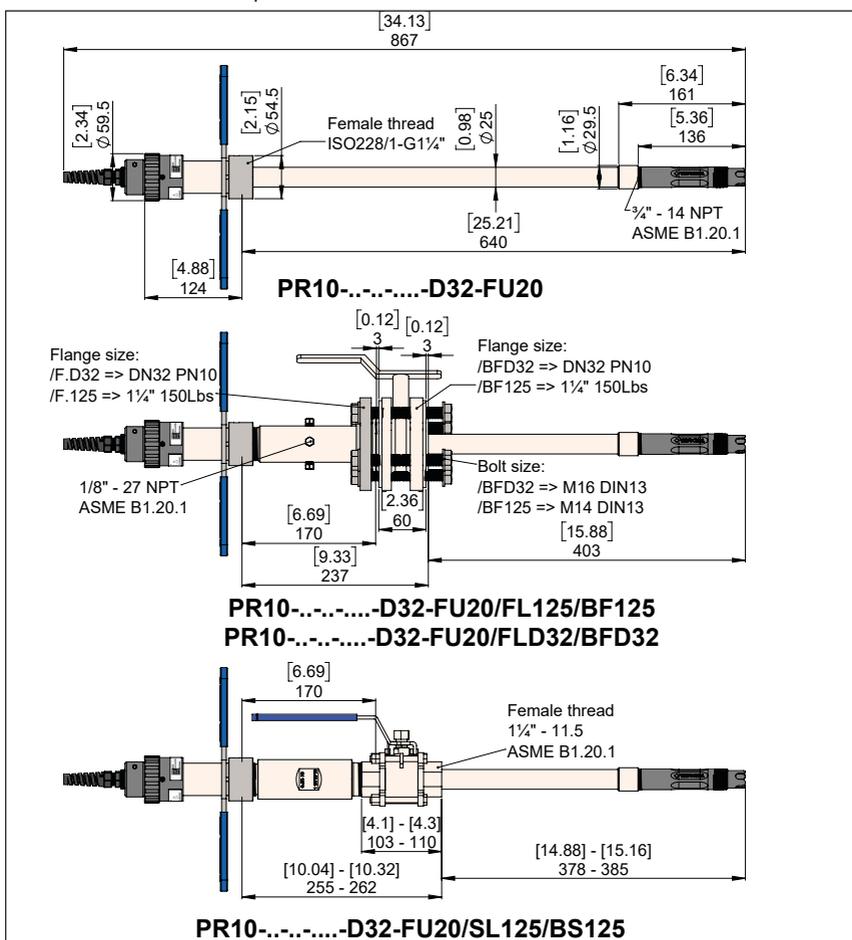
Dimensional drawing PR10...-D32 with mounted FU20 sensor
